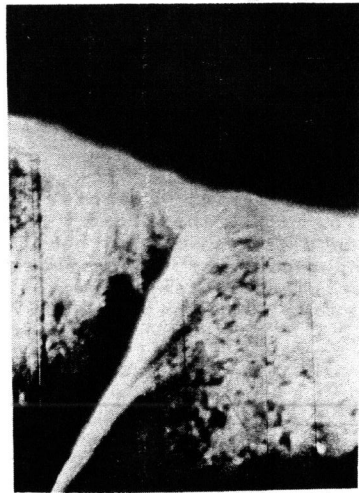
Typical comb crack propagation observed during intermittent machining
